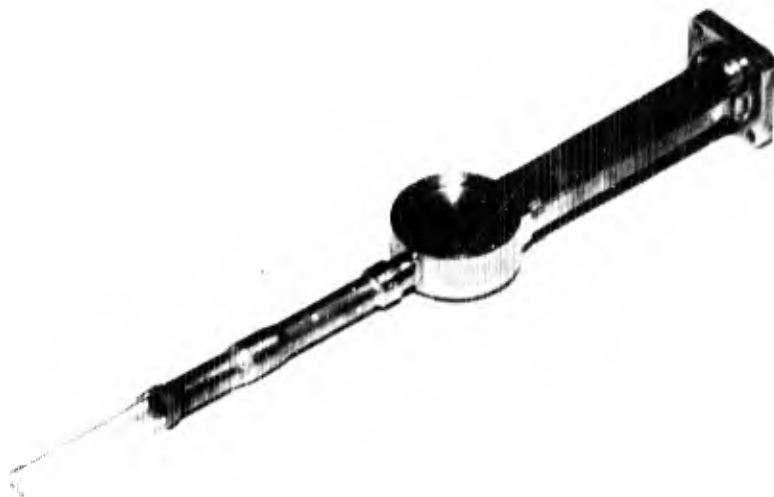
Microwave cavity ready for heliarc welding.
